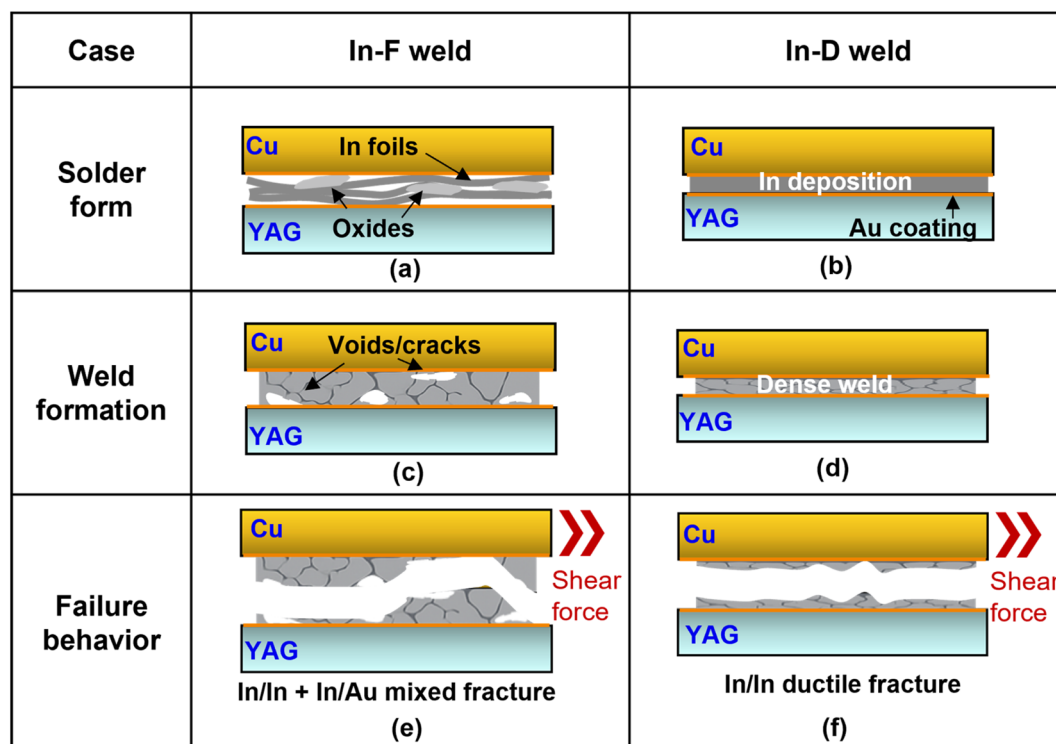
Schematic of the weld formation and failure behaviour under different solder forms: (a), (c) and (e) In-F weld, (b), (d) and (f) In-D weld.
